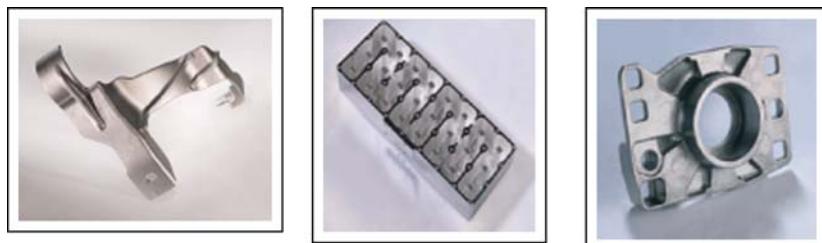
Left:* Air manifold harness weldable on hydroformed part, thin wall, high ductility (VW and Audi) 130 g, replaces two parts previously produced by stamping. Front part of engine, vibration issues (fatigue); *Centre:* Antenna housing for tower mounted amplifier (TMA). Corrosion resistant, precision near net-shape, good surface quality, easy to coat (3–5 µm silver), with good electrical and inter-modulation properties; *Right:* Flange energy crash absorber; near net-shape component for AUDI A6 V8 energy management system for bumpers (Courtesy of SAG GmbH)
